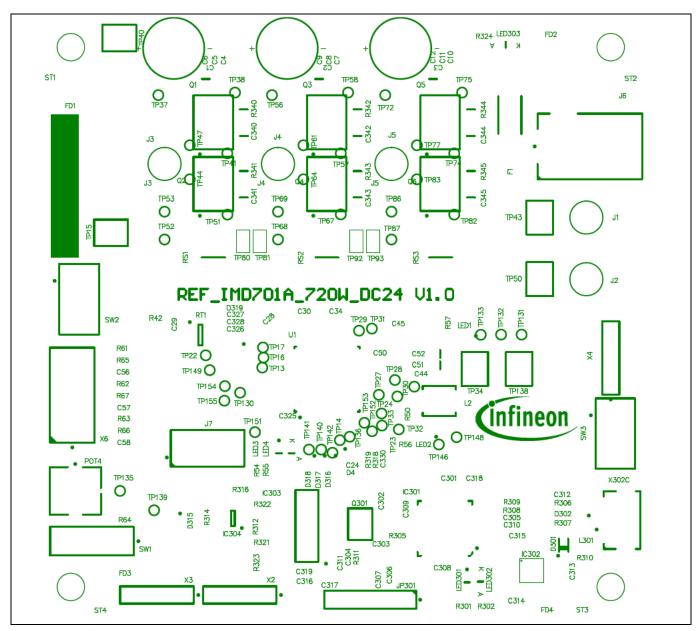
REF_IMD701A_720W_DC24 PCB top silkscreen
